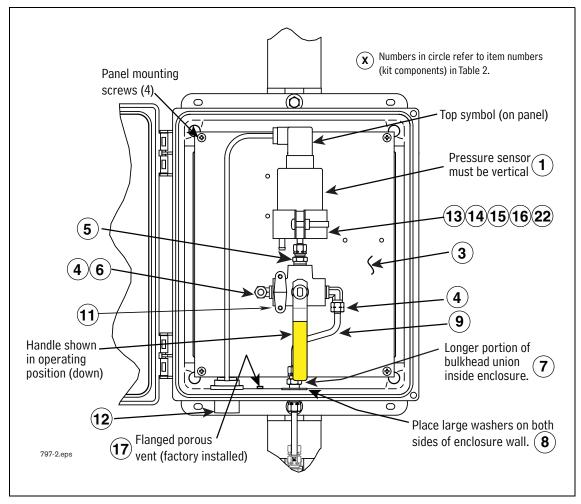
Mounting Pressure Sensor Assembly onto Composite Panel
